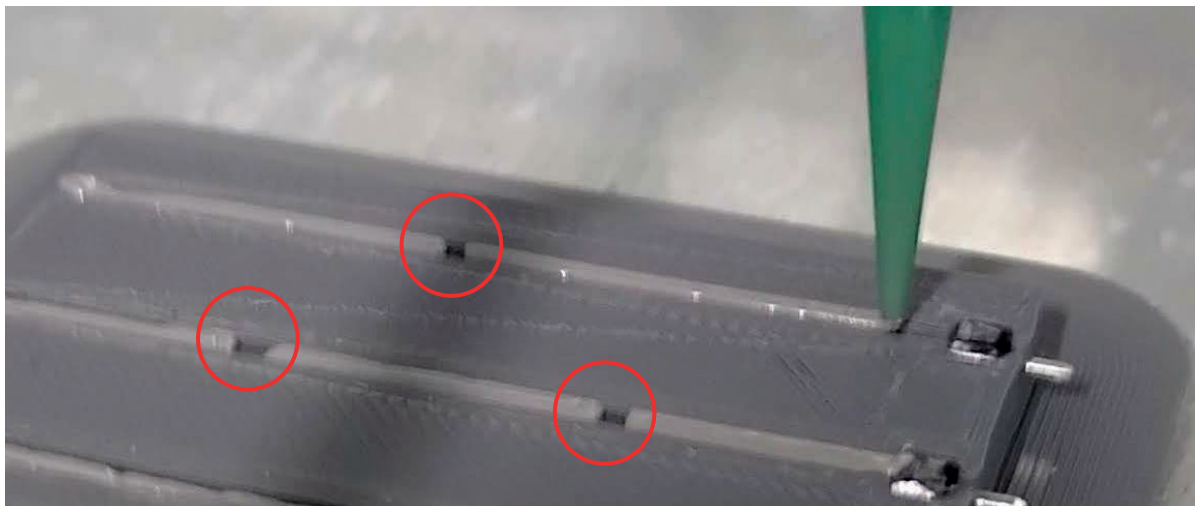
Breaks in the printed line of solder paste caused by air-bubbles.
